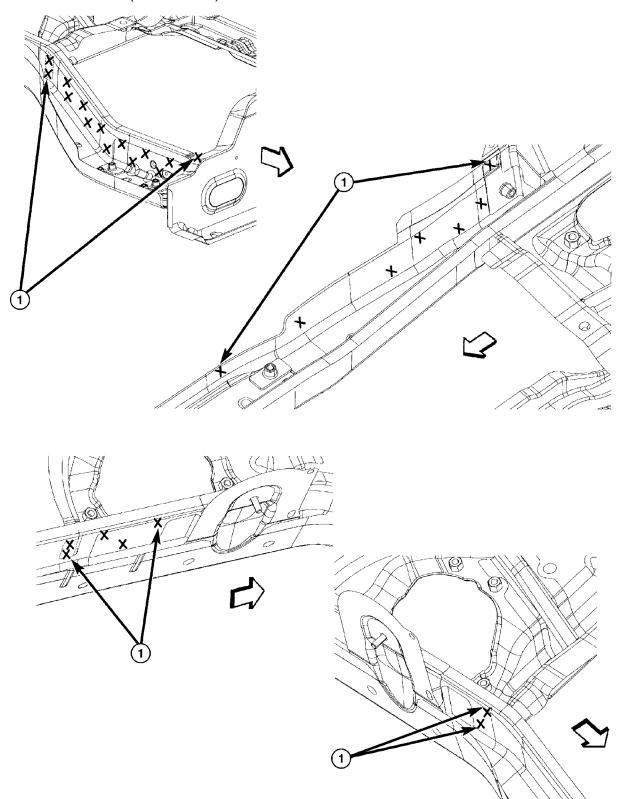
REAR FLOOR PAN SIDE RAIL REINFORCEMENT TO REAR FLOOR PAN SIDE RAIL TO REAR SUSPENSION CROSSMEMBER
